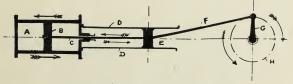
DIAGRAM OF ENGINE PARTS.
